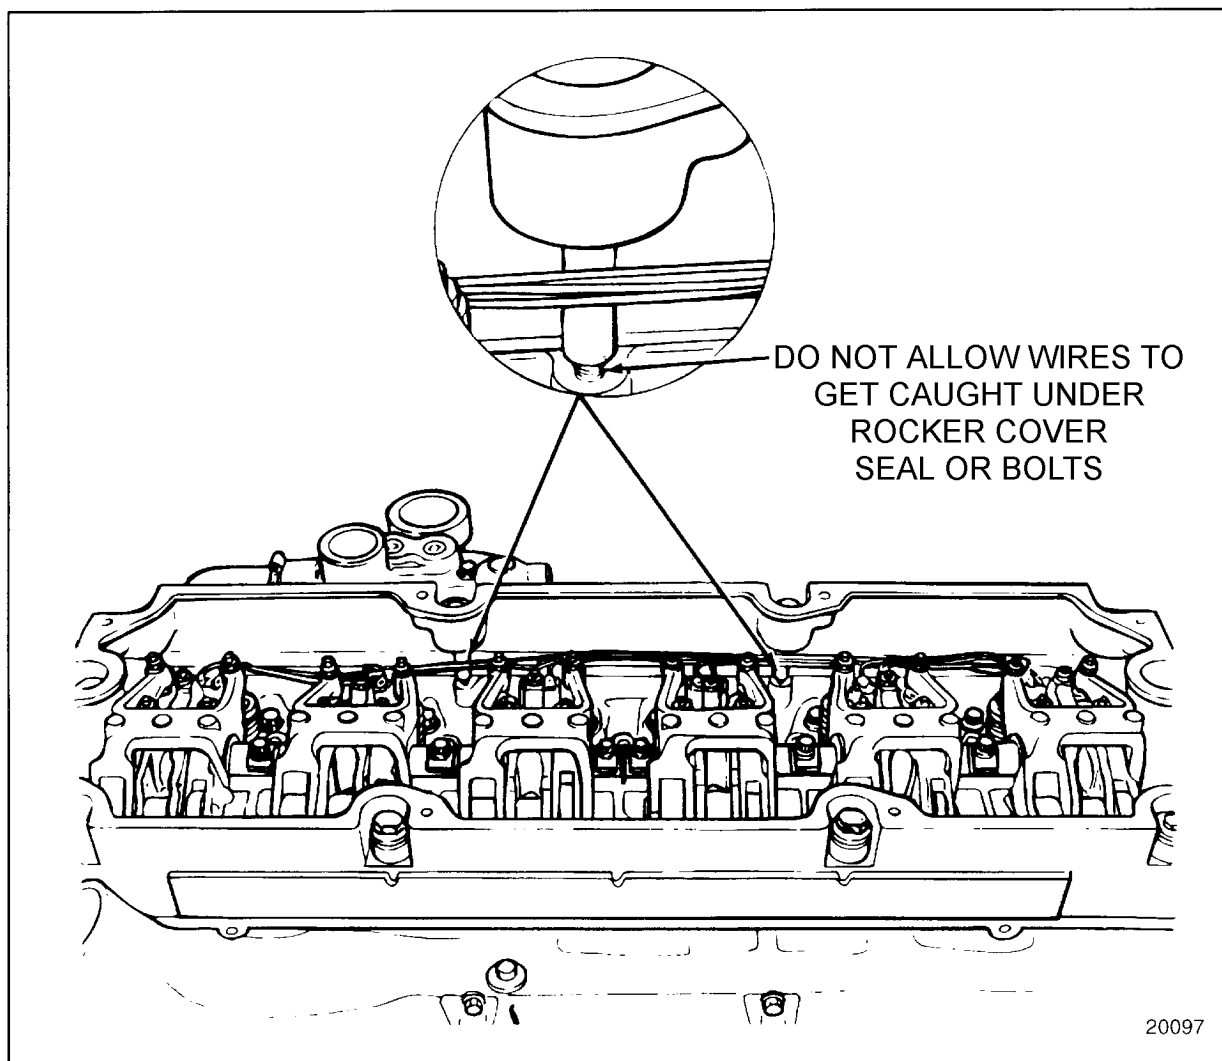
Rocker Cover Base Hold-Down Bolt Installation
